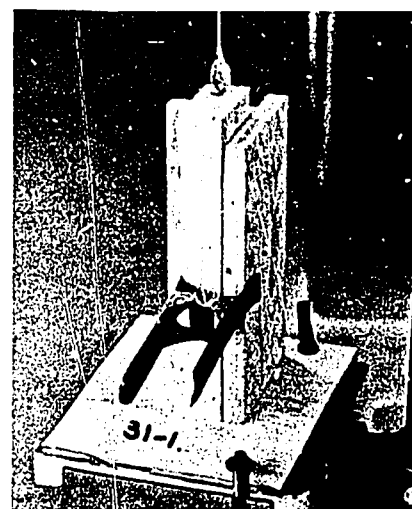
Boring $\frac{3}{4}$ " Engine Hole 2" Deep
